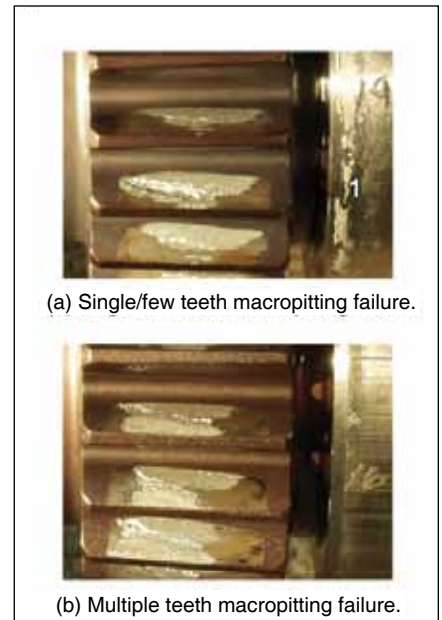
Typical macropitting pinion tooth surface fatigue failures.
